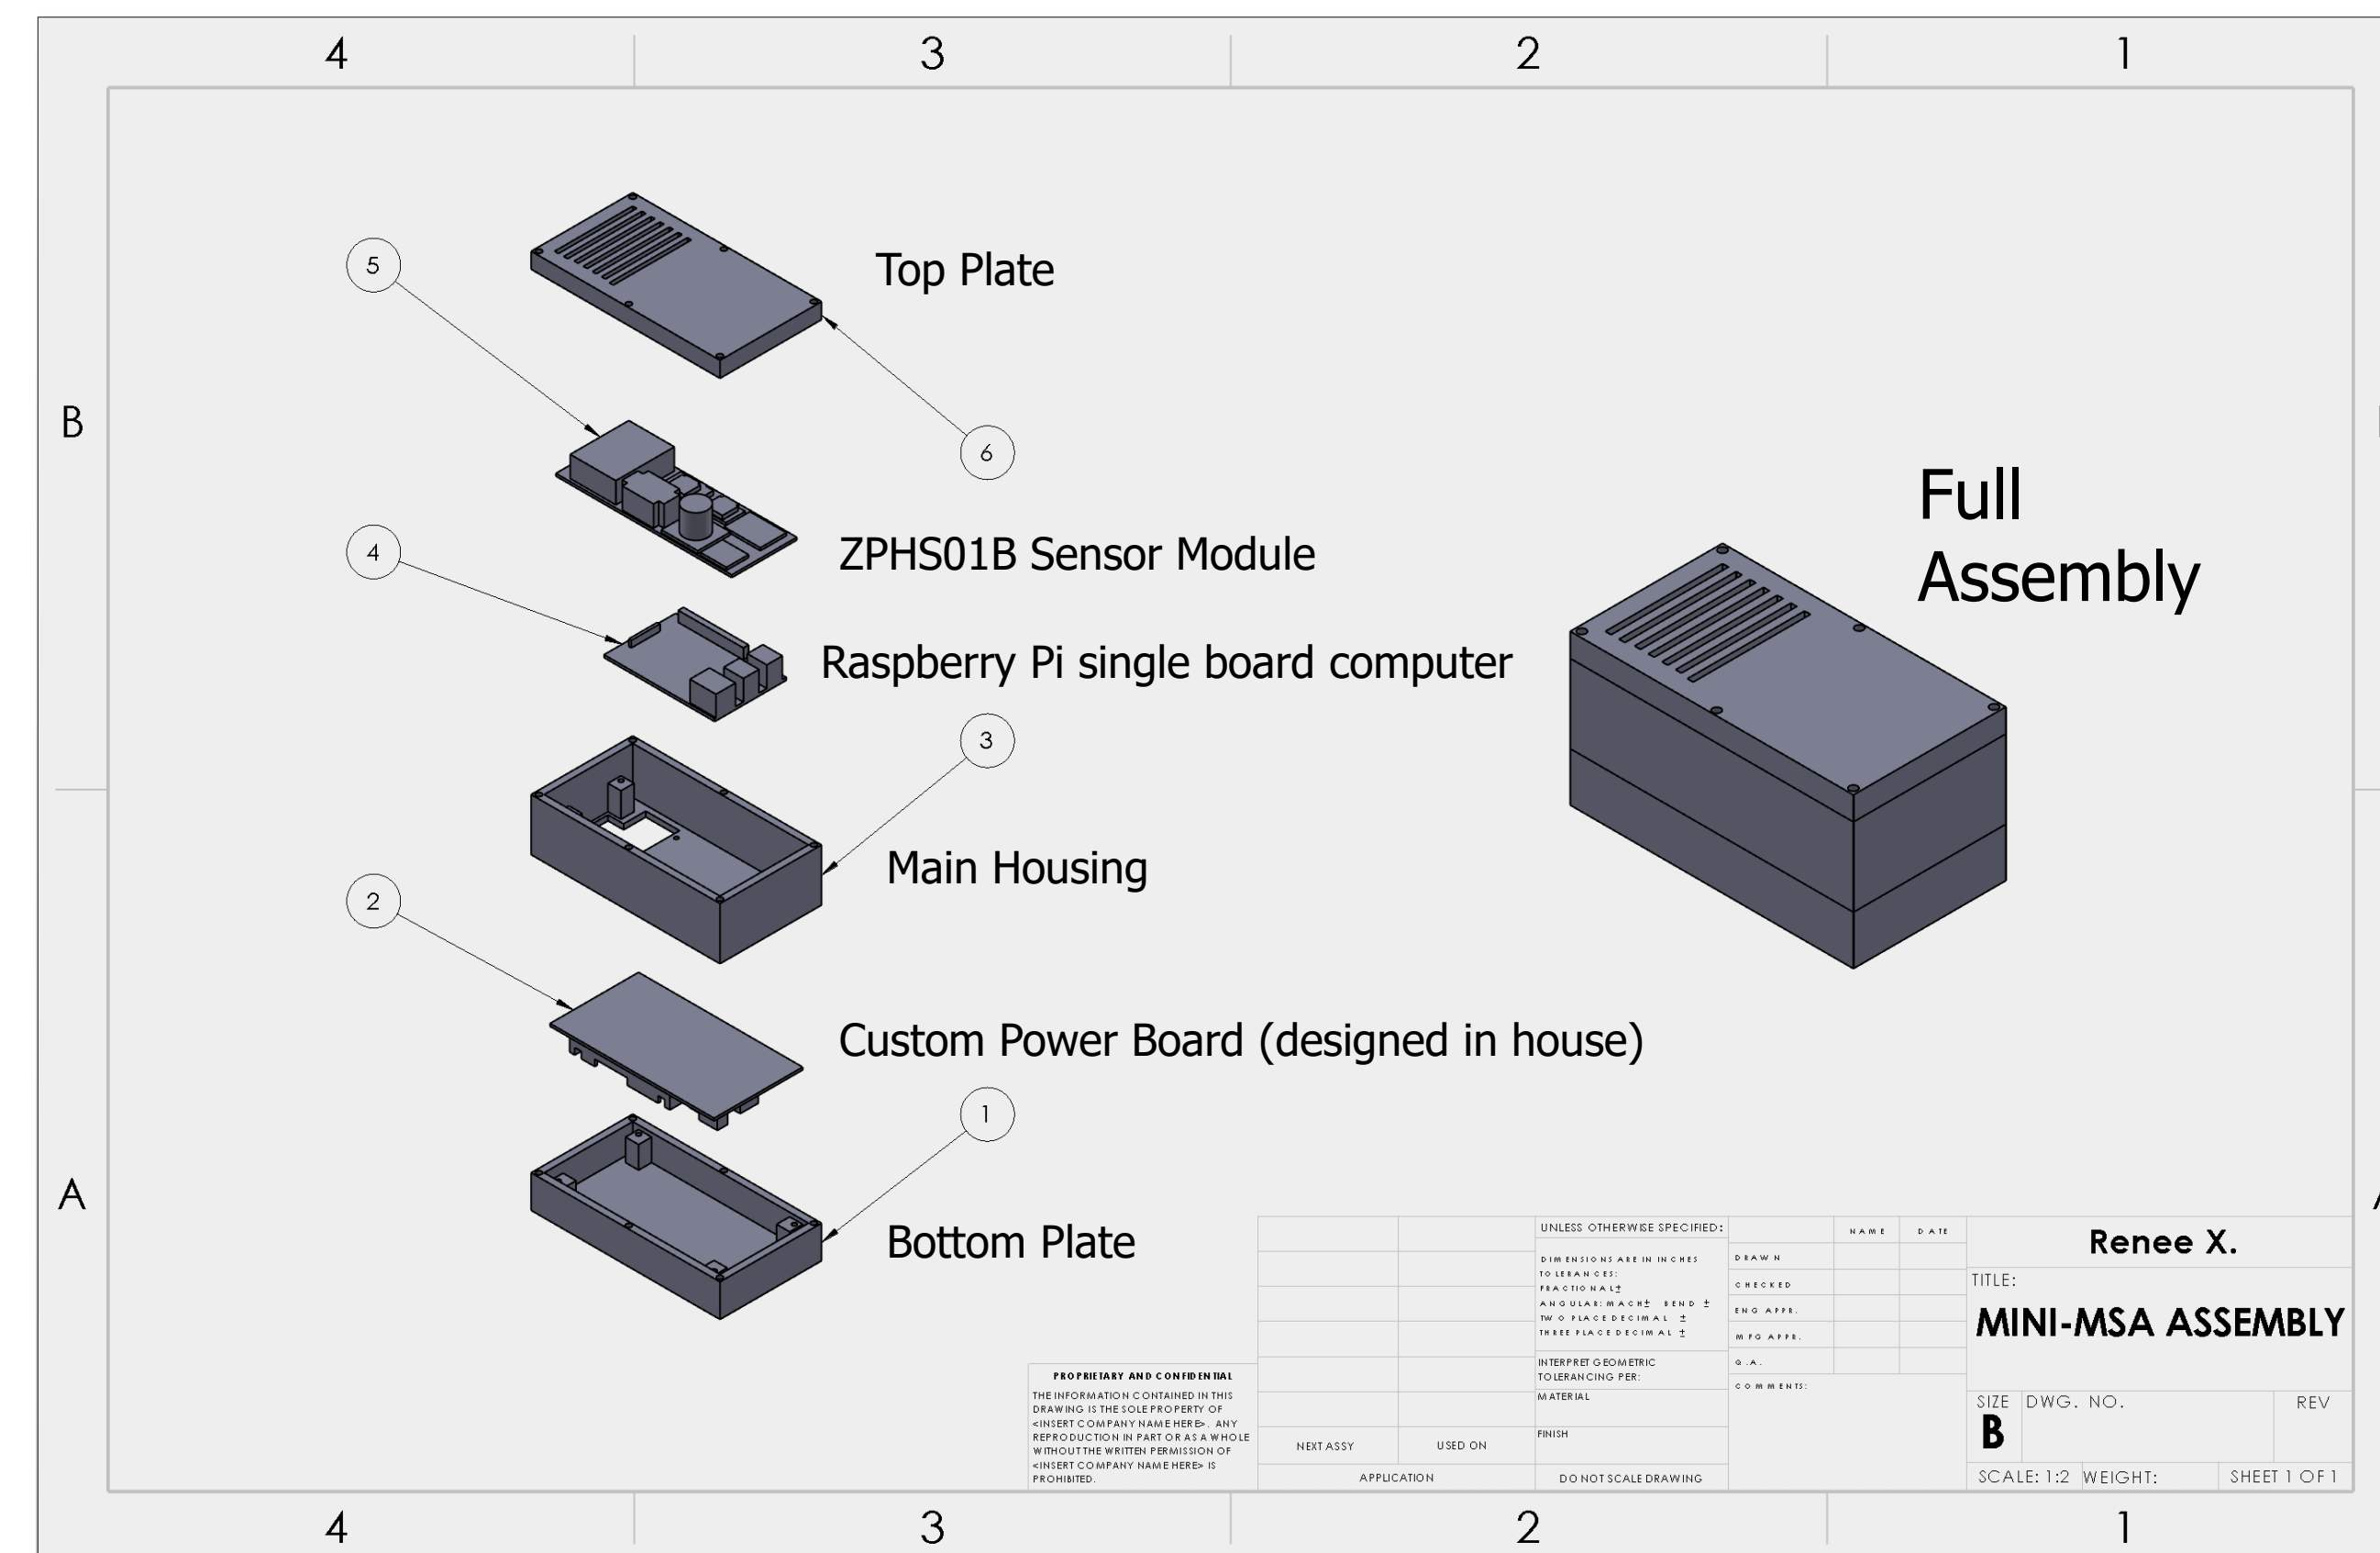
Prototype housing design. The final design will have more air flow and attachment points for hanging under a balloon or drone. The GPS module will be added inside the assembly as well.
